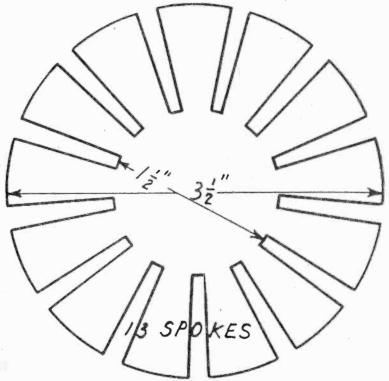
Former to be used for winding coils for the Ultradyne circuit. This illustration may be used as a cutting template.
